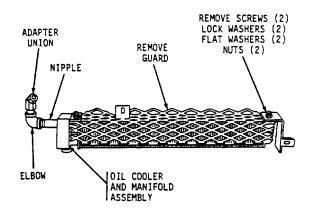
Mechanical transmission oil cooler assembly-disassembly and assembly.
